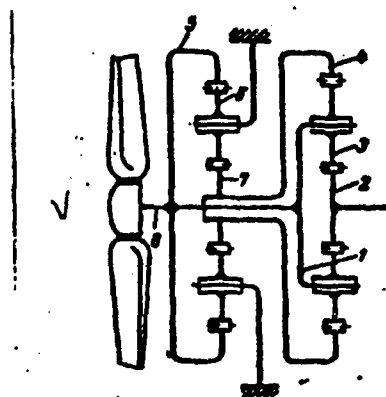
Diagram of a differential reducer: 1, Satellite carrier; 2, Driving gear; 3, Satellite gear; 4, Gear with internal toothing; 5, 7, Gears; 6, Idle gear; 8, Screw shaft
